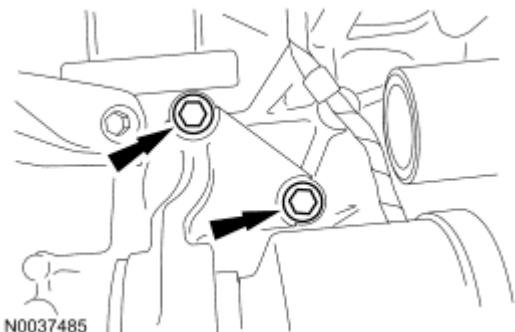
Locating RH Halfshaft Carrier Bearing Bracket Bolts
